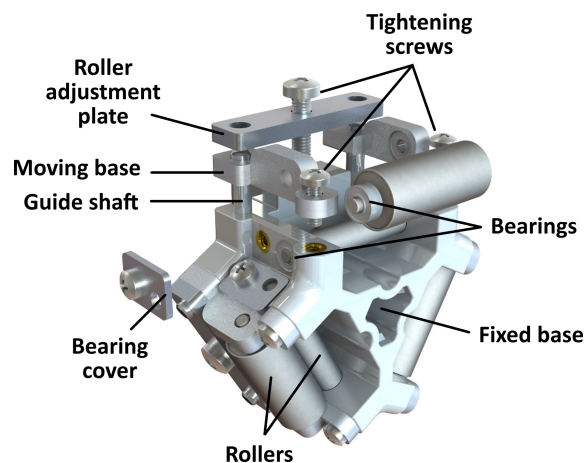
Exploded view of the end effector with interior components. The pinch-rollers and the adjustment mechanism for each roller pair is shown.
